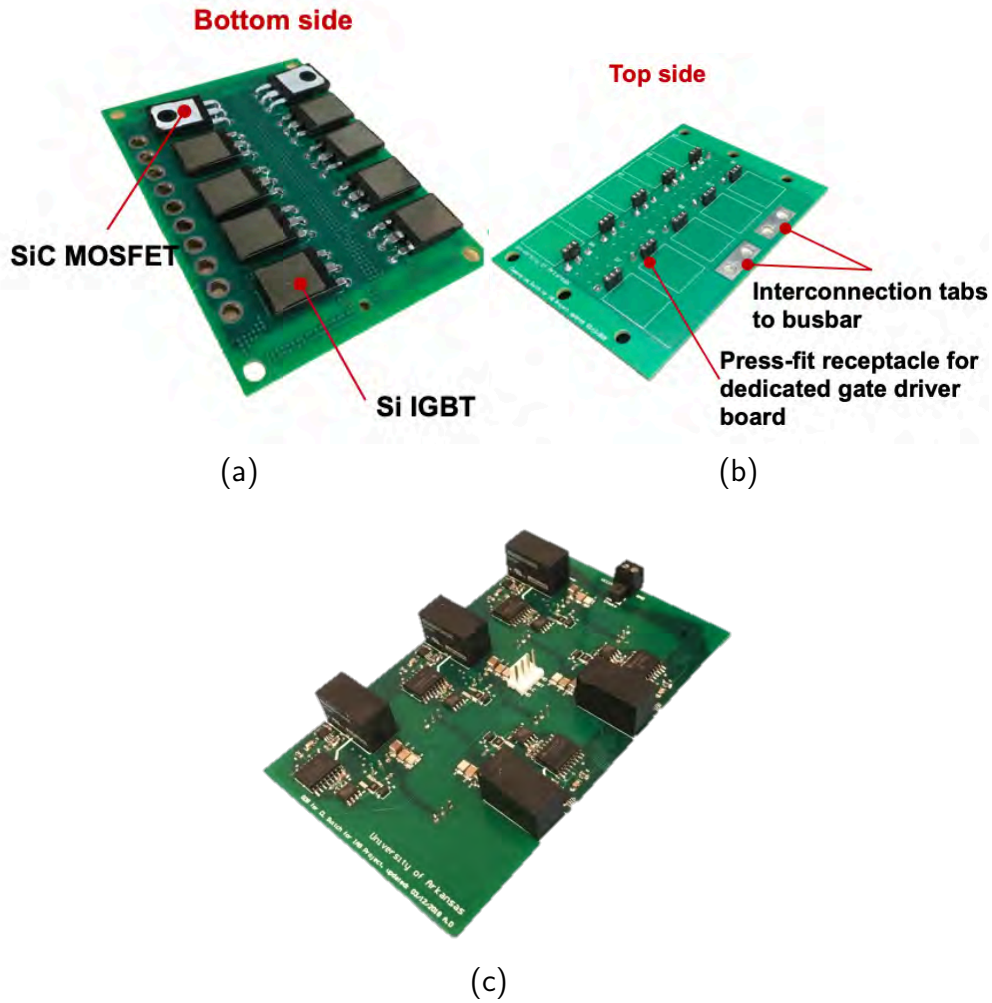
The discrete-device-based PCB for the clamping-leg: (a) Bottom-view (b) Top-view (c) Dedicated gate driver board. [Source: Photo by Author.]
